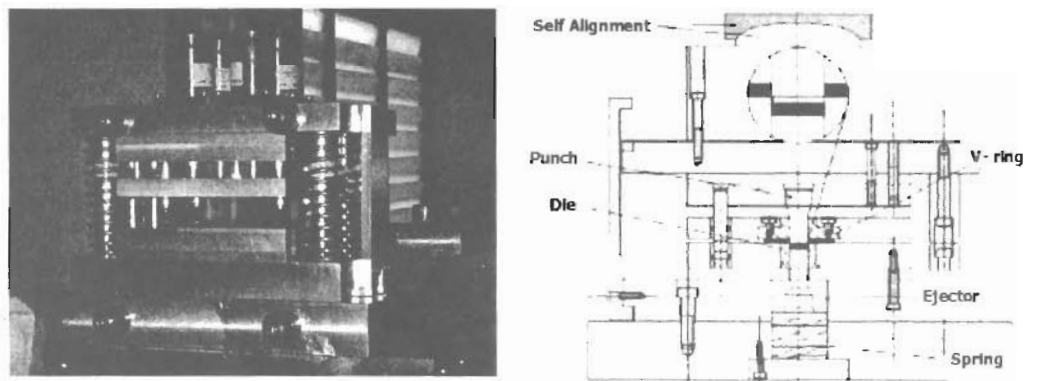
Section view for the position of Punch, Die, V-ring, Ejector, Spring and Self alignment
